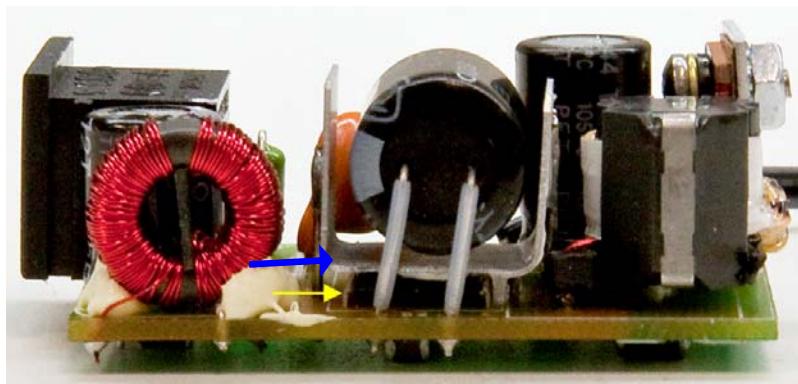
Side View Showing TOP264VG V-Package with Heatsink Mounted on Top.
